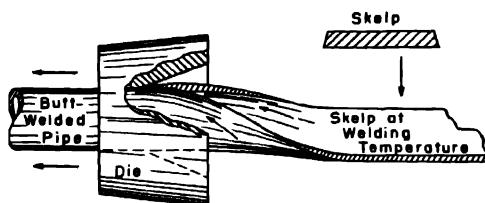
A common method of curling and butt-welding pipe.
